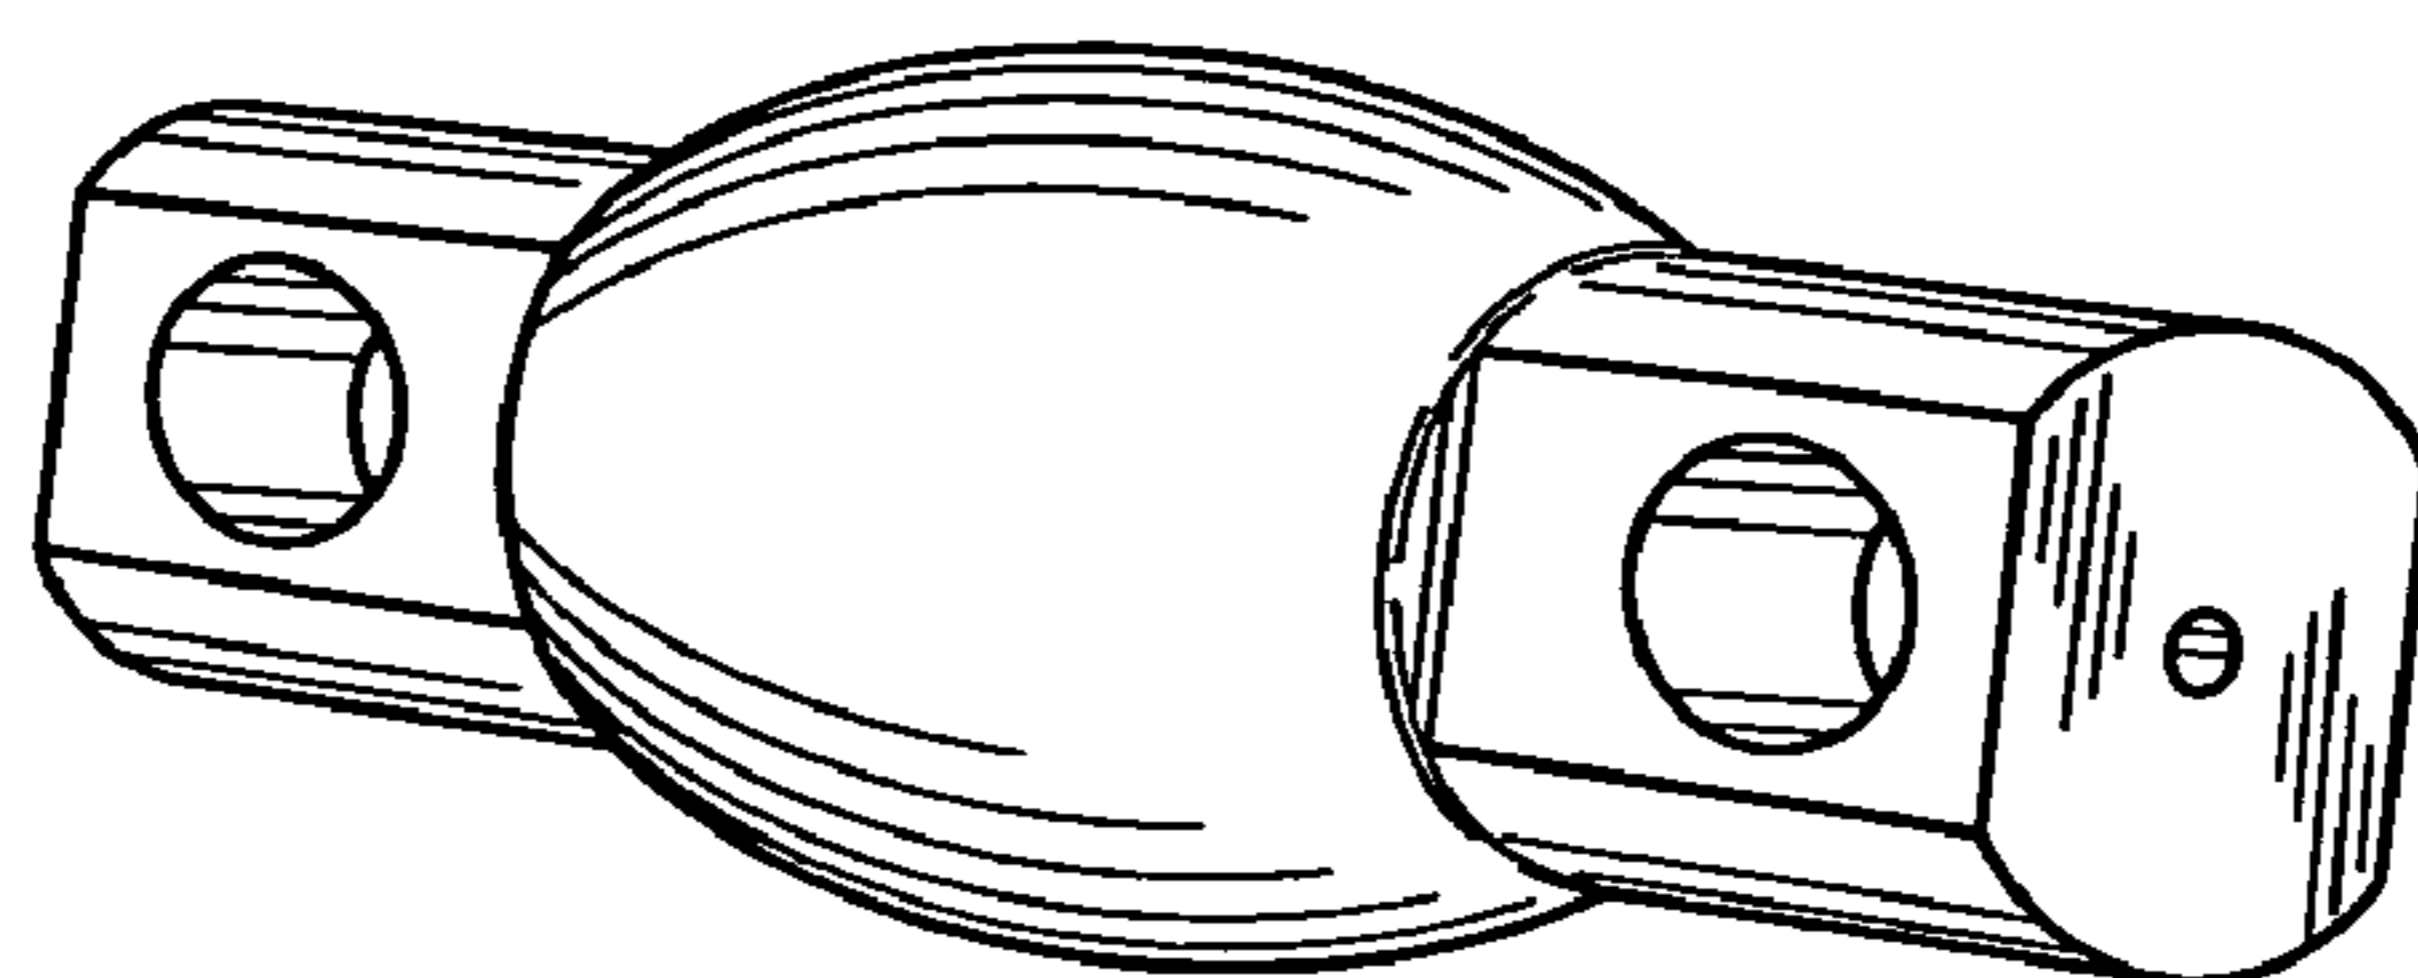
is a front view of the elliptical bearing, the rear being a mirror image;
